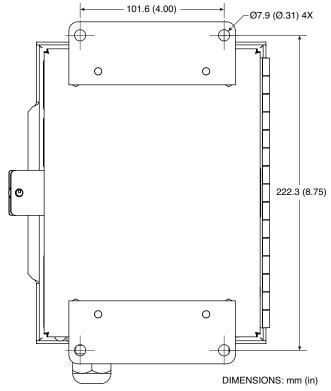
CNi-CB120SB Mounting Dimensions, Rear View
